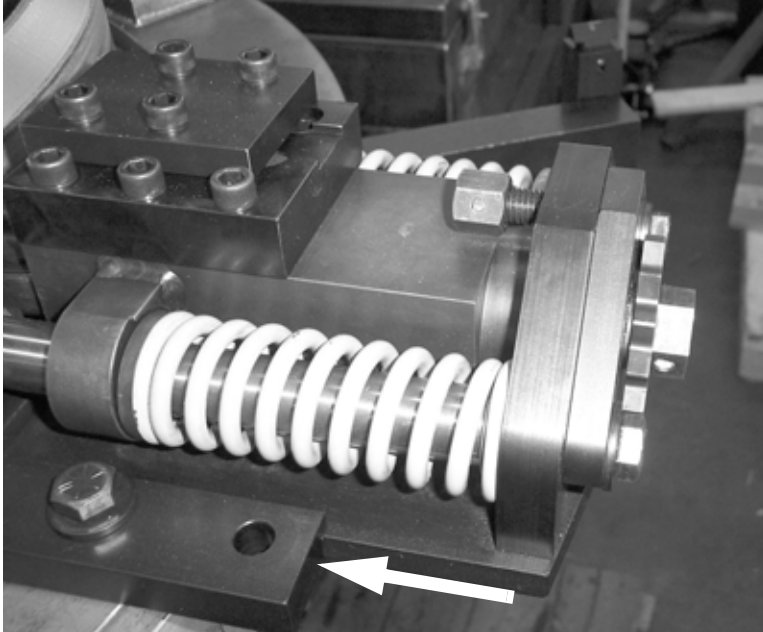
Slide the base plate of the tool slide into the channels of the slide mounting blocks until the tracking wheel touches the pipe surface.
